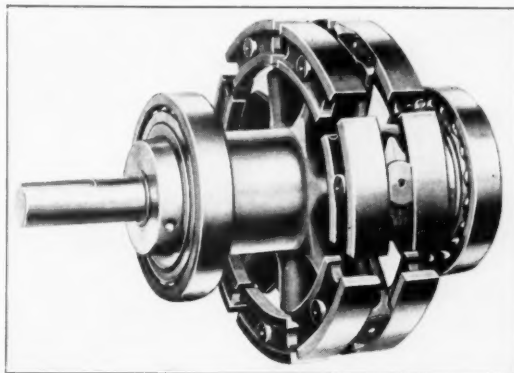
Cylinder body assembly of the Hele-Shaw pump, showing plungers, slippers, ball bearings and spindle.
